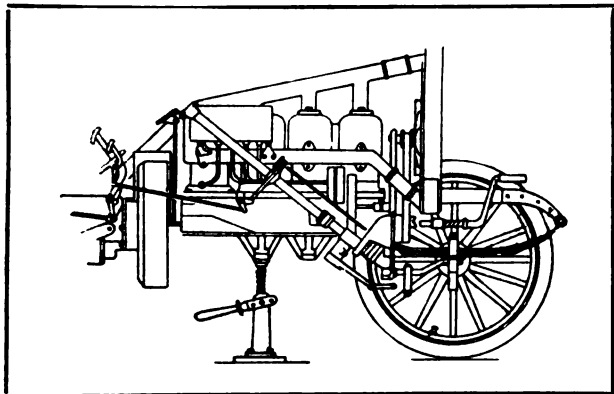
Determining Play in Main and Connecting Rod Bearings by Jacking the Crankshaft.
